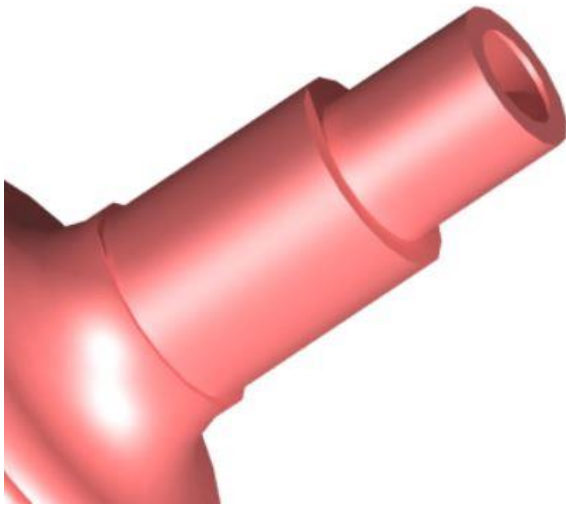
Detail of primary pulley, connection insert (Final CAD drawing)
